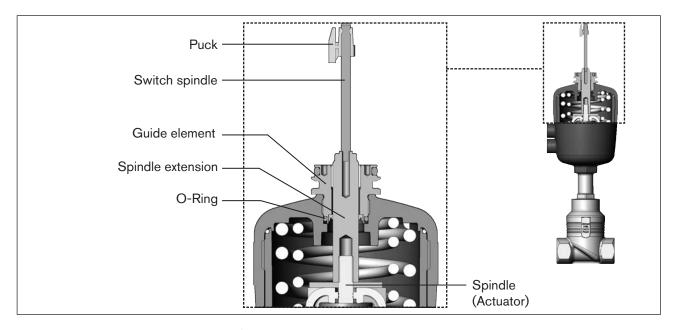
Installing the switch spindle for process valves belonging to series 26xx and 27xx
